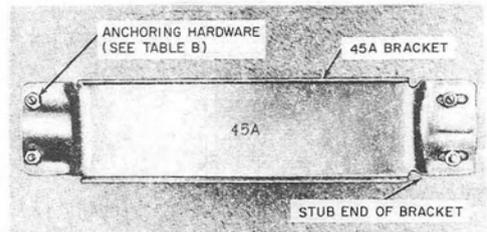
45A Mounting Bracket Mounted Horizontally on Wall
